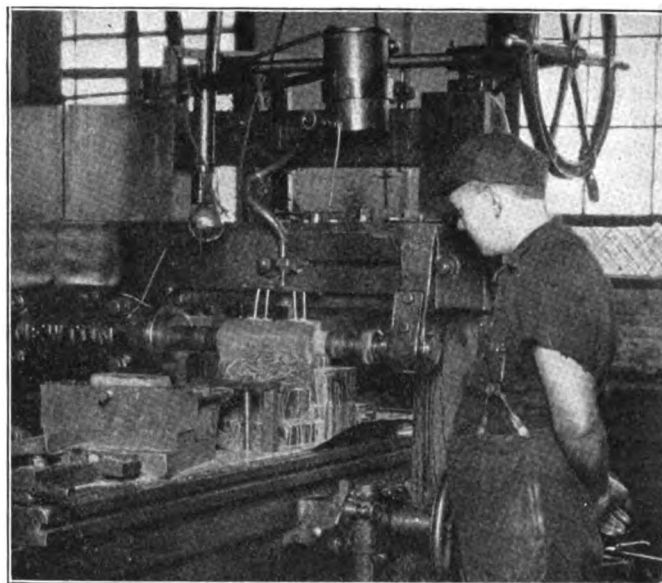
Milling a link bracket on a horizontal miller with the cutters completely covered with the lubricant
